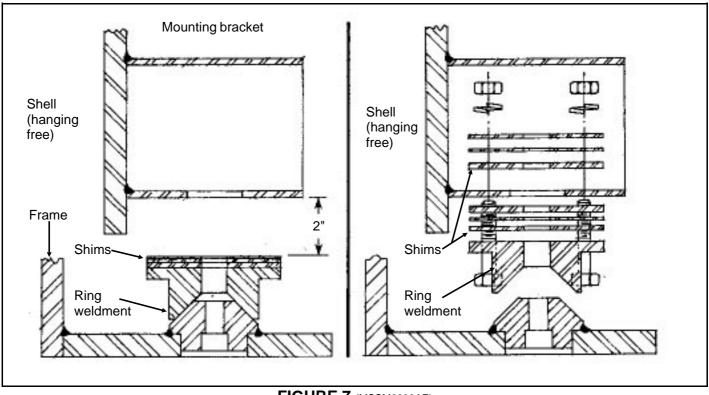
(MSSM0208AE) Shimming and Reconnecting Ring Weldments
